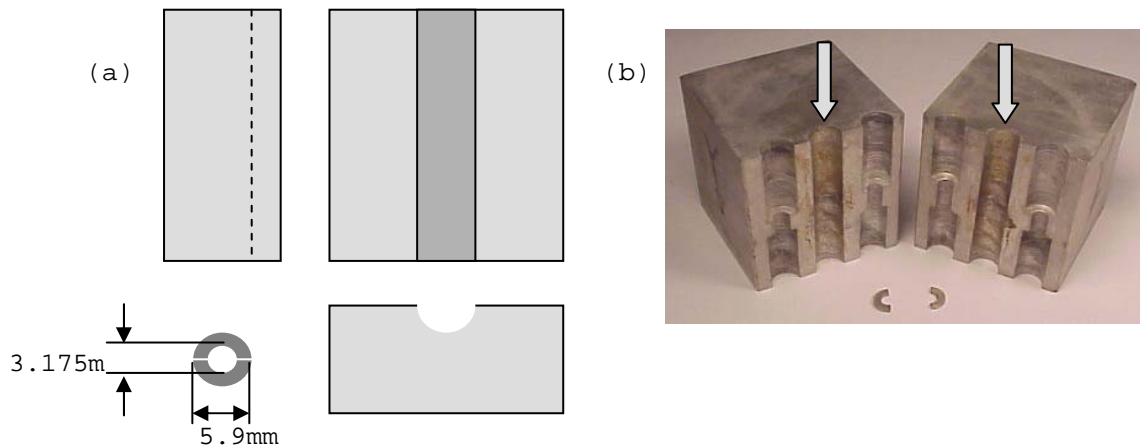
(a) Schematic and (b) picture of mold and C-shapes for cylinder-type joint.
